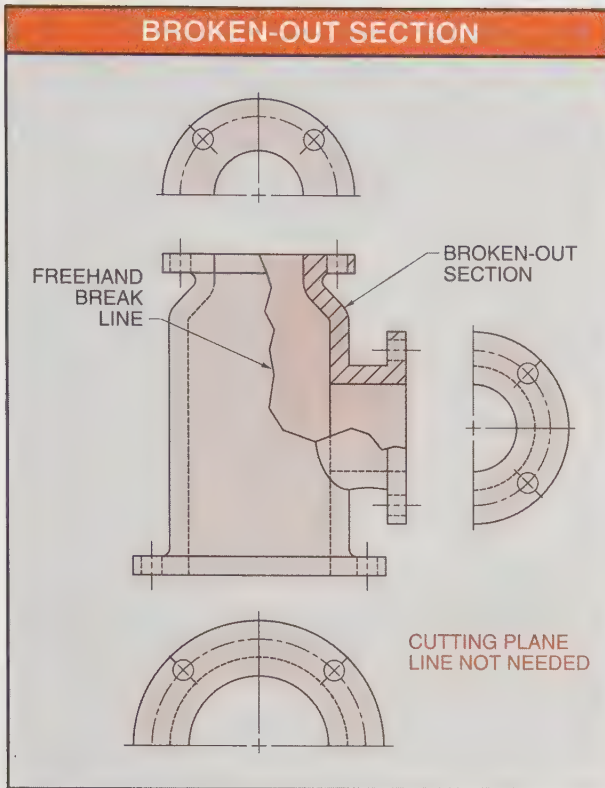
A broken-out section is a sectional view in which a small portion designated by a freehand break line is removed.
